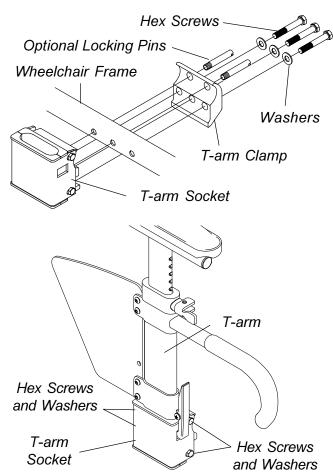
ADJUSTING THE T-ARMS - T-ARM SOCKETS
